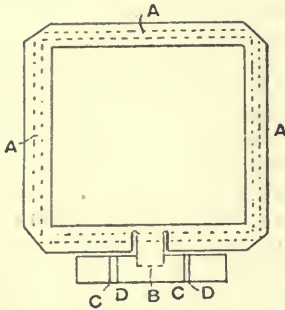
SLIDING FRAME FOR VIEW METER.
